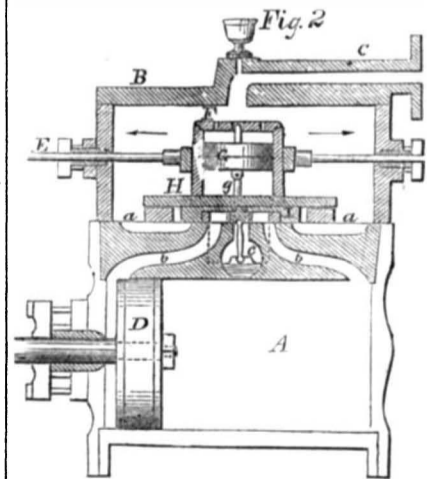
is a vertical section taken through the steam valve chest and cylinder. A is the cylinder, B the steam chest, C the inlet steam pipe, D the piston, E the valve rod, F a small cylinder in the valve chest, which has a small piston, G, in it, having a jointed arm, g, in it, extending down within the exhaust cavity of the valve seat, and rocks on an arbor or shaft therein. The piston, G, is fitted steam tight in its small cylinder, and the pressure of the steam comes upon its top surface. There is a plate or valve driver, to which the small cylinder is attached; it laps around the valve ends leaving a small space between them. I is a chambered slide valve, and a a are cavities in the face of the valve seat, and by the valve connect with the ports that lead to the cylinder, A. The valve driver plate is placed between a valve at each side, hooking around their ends with the small space between them, as shown, for lead; it does not lie nor press on the top of the valves.
